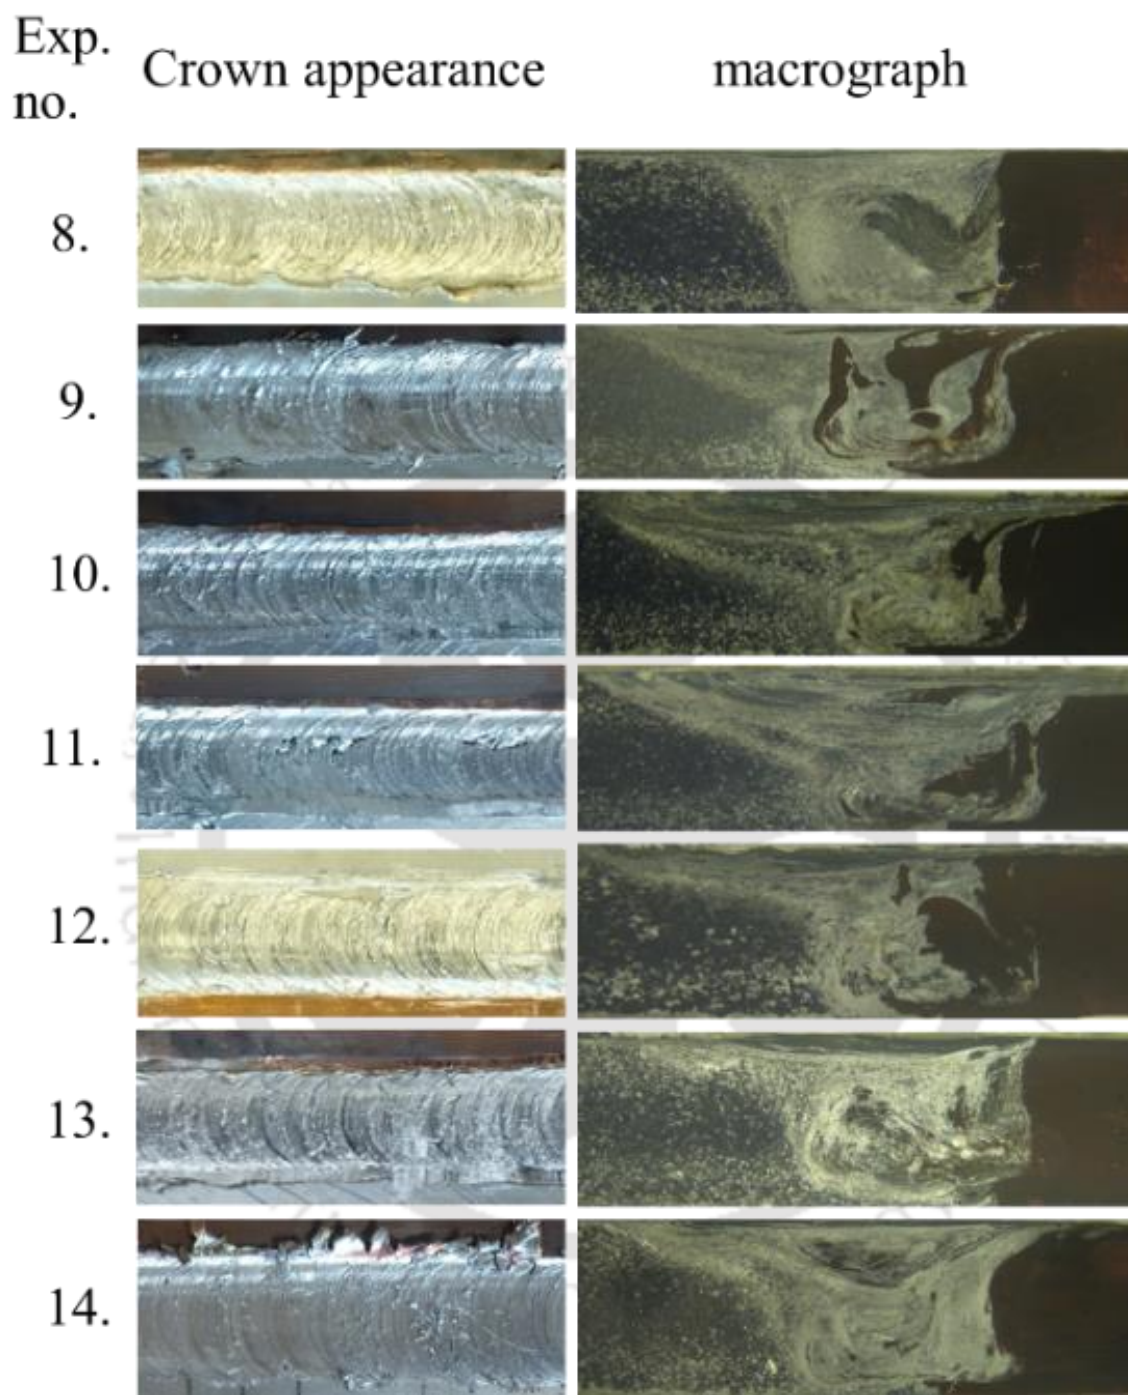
Crown appearance and macrograph of weld joint corresponding to welding conditions of Table 4.14 from Exp. 8 to Exp. 14.
